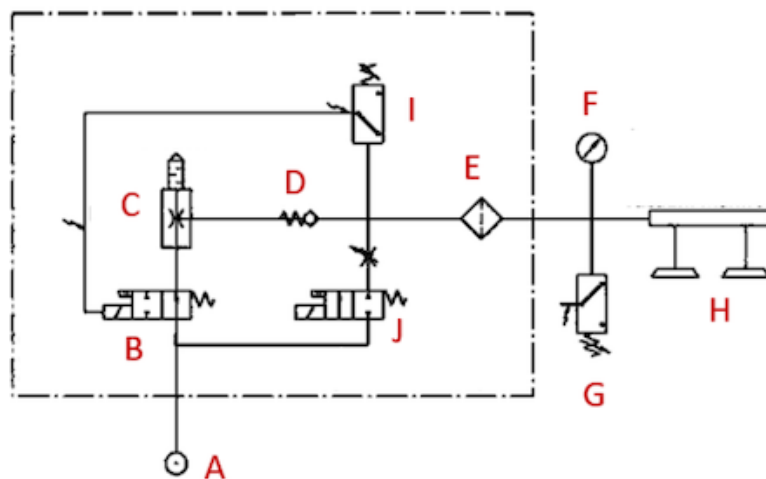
Vacuum pick and place application components: compressed air entry point (A), compressed air control valve (B), vacuum generator (C), non-return valve (D), vacuum filter (E), vacuum pressure gauge (F), external vacuum switch (G), vacuum suction cups (H), internal vacuum switch (I), & compressed air blow-off valve (J).
